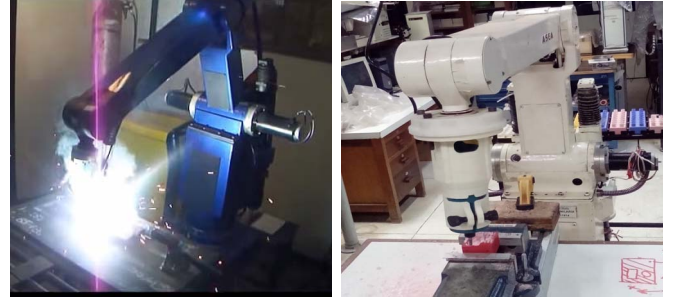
ASEA manipulator after the retrofitting process: a) UFMC (Welding) and b) UnB (Machining)
